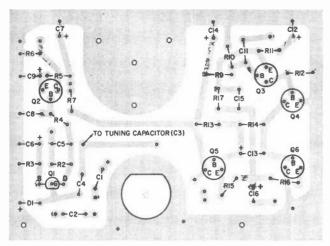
Flip side of printed circuit board shown in Fig. 2. Note positions of the components, and, in particular, observe lead orientation of the various transistors. The center hole (shaft) for mounting C3 is eventually enlarged so that the shaft passes through freely without binding and C3 is rigidly supported by bolts through the 3 remaining small holes.
